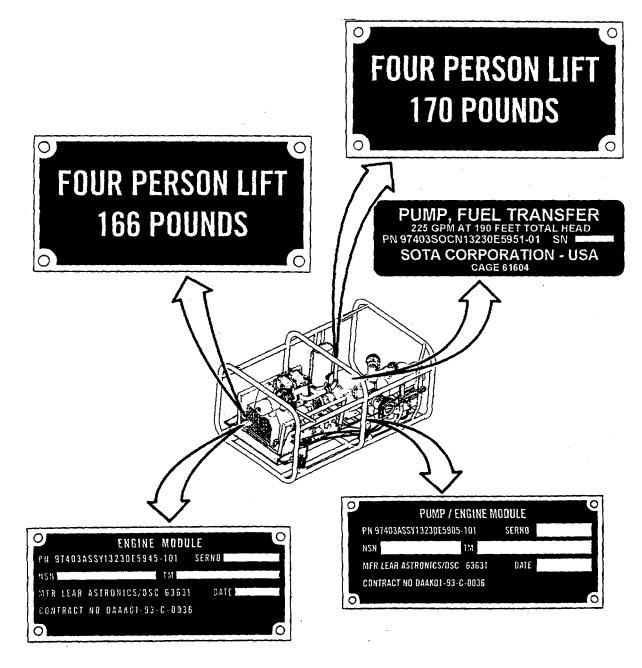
Decals ad Instruction Plates, Pump-Engine Module (Sheet 1 of 2)
